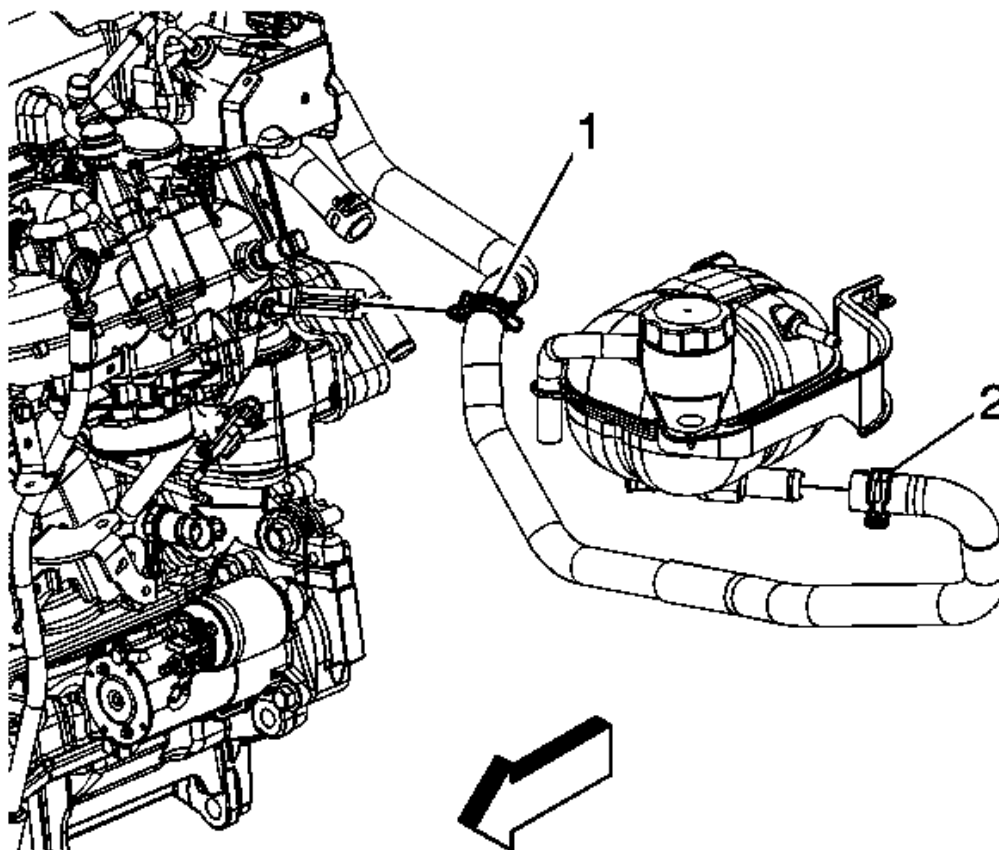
Identifying Surge Tank Outlet Hose Clamp (At Surge Tank)
